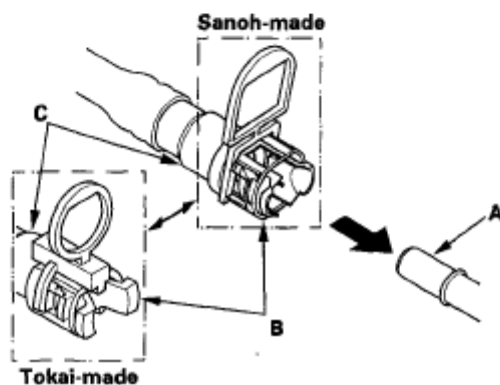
Aligning Quick-Connect Fittings With Line And Retainer Locking Tabs With Connector Grooves
